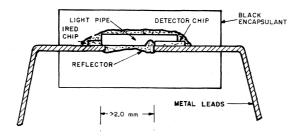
Cutaway view of Harris H11AV: 6 pin DIP optoisolator approved to VDE Safety Standard 0883/6.80, with testing to 0730/6.76 and 0860/11.76.
